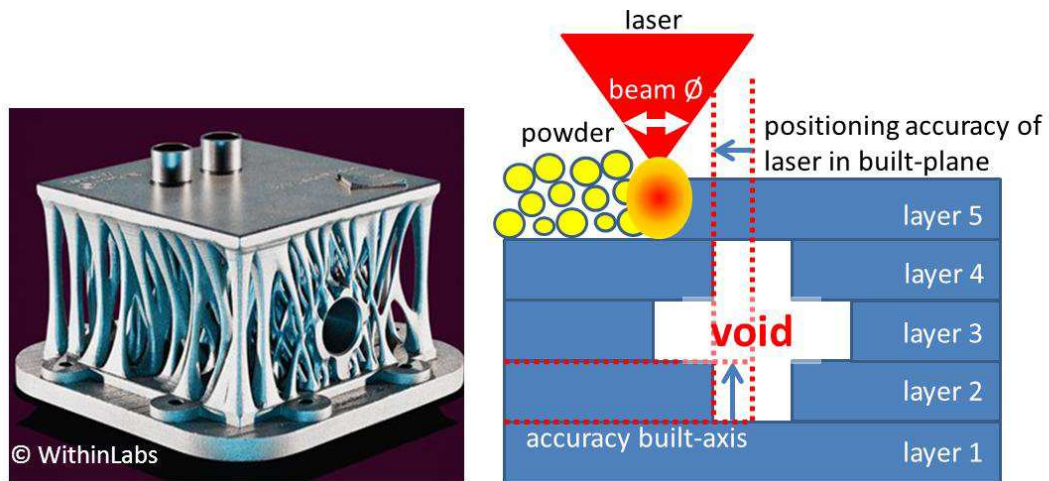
Photographic image (from WithinLabs) of SLM fabricated part showing the geometric freedom SLM technology offers (left). Schematic illustration of SLM process highlighting the mechanisms involved defining the process’s accuracy (right).
